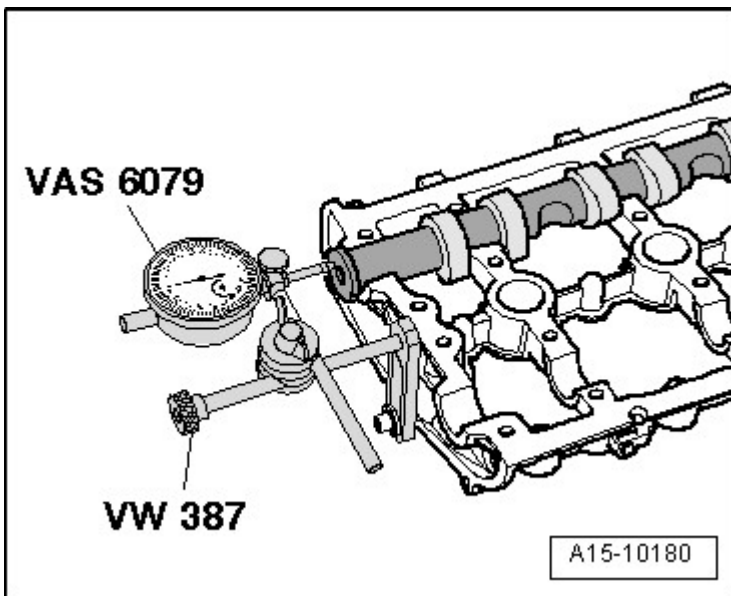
Dial Gauge VAS 6079 Secured To Cylinder Head With Universal Dial Gauge Holder VW 387
